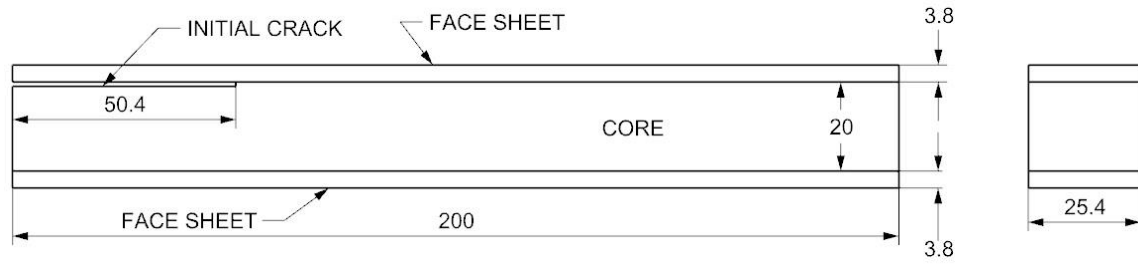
E-glass face sheet/polyurethane foam core sandwich composite test specimen. Dimensions are in mm.
